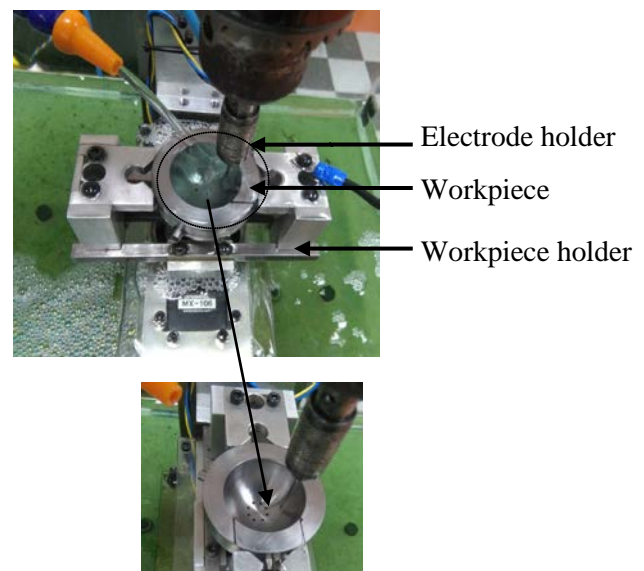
Novel workpiece positioning system mounted on EDM tank
